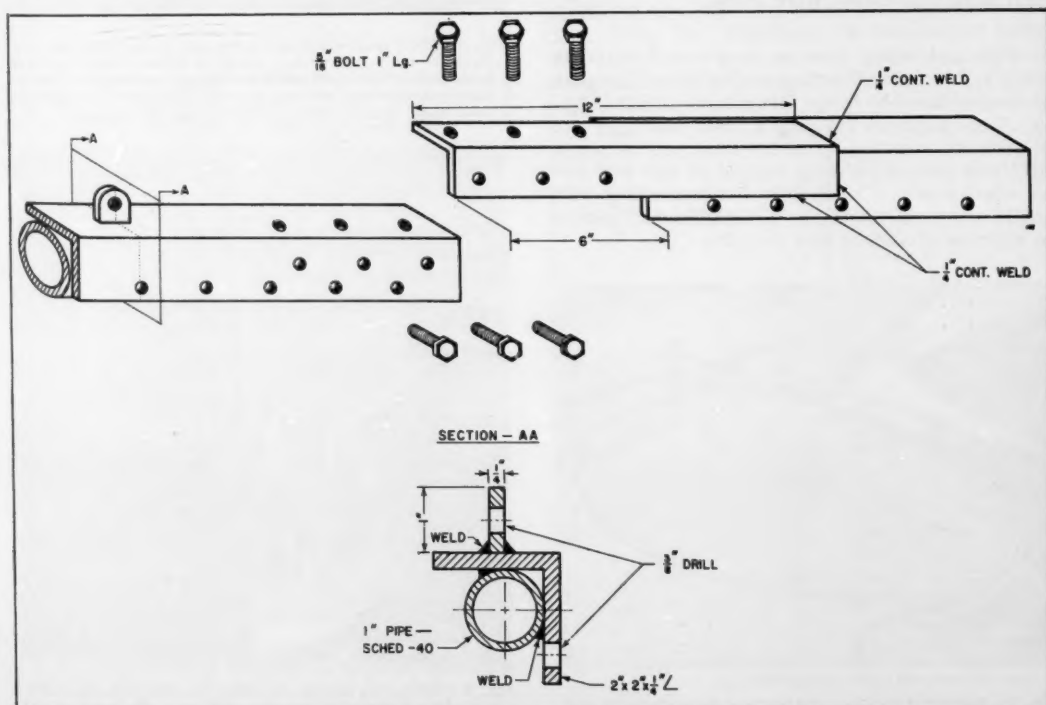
Design and construction of lift-net hoop frame. Upper diagram shows method of bolting together the hoop's two halves. Cross section of lift-net hoop frame (Section AA) shows details of angle iron and pipe frame, lift-line pad eyes, and net-attachment holes.
